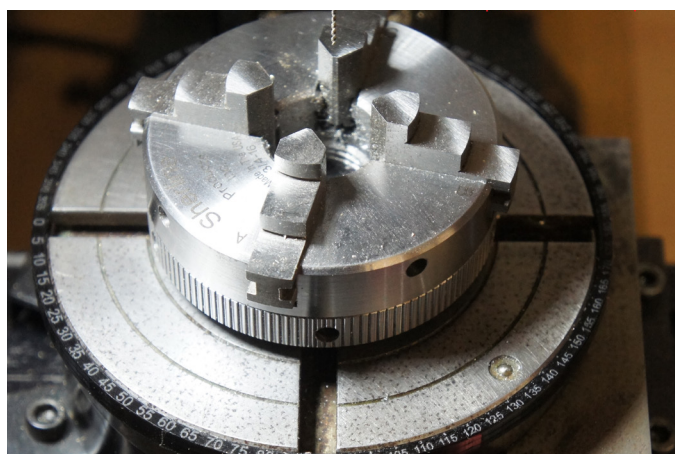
A top view of the dial elevation moved up level with the table surface for maximum clarity after mounting a 'job' onto the rotary table.
